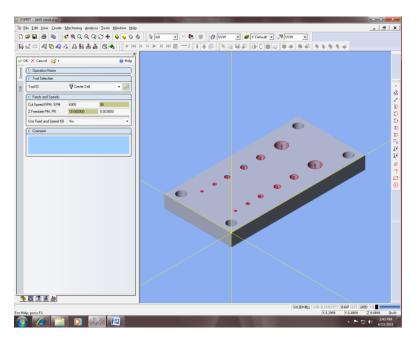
Demonstration piece that show tolerance in drilling
